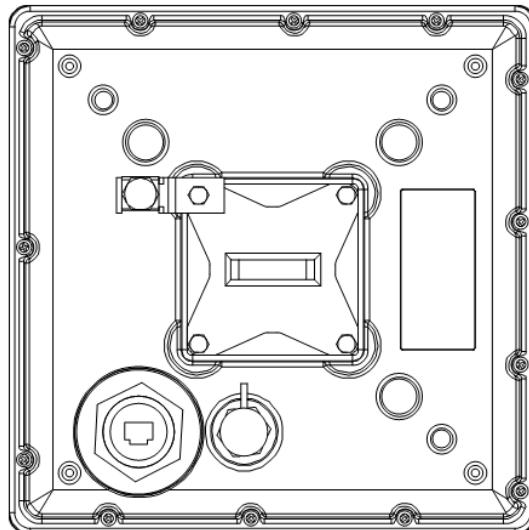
Attaching the Mounting Bracket Unit Anchor
